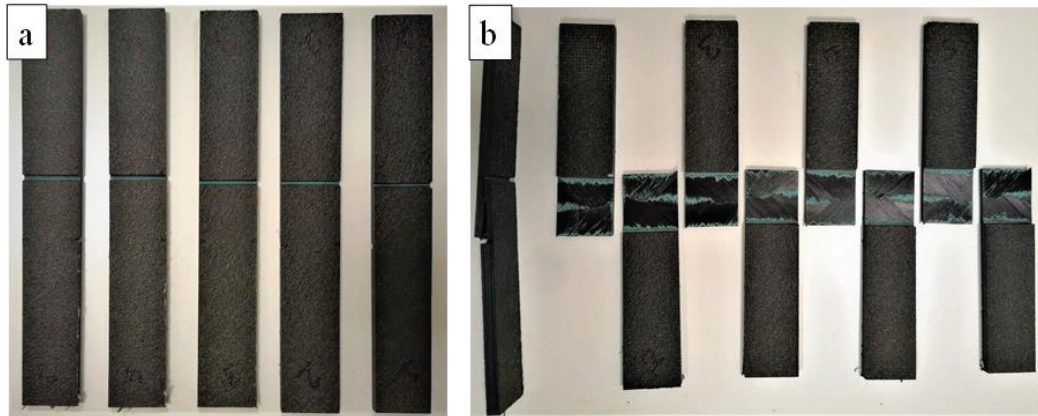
2. Single lap shear test specimen A (laser surface modification with 0.15 mm laser offset distance) a) Before the test b) After the test (the fracture surface)
